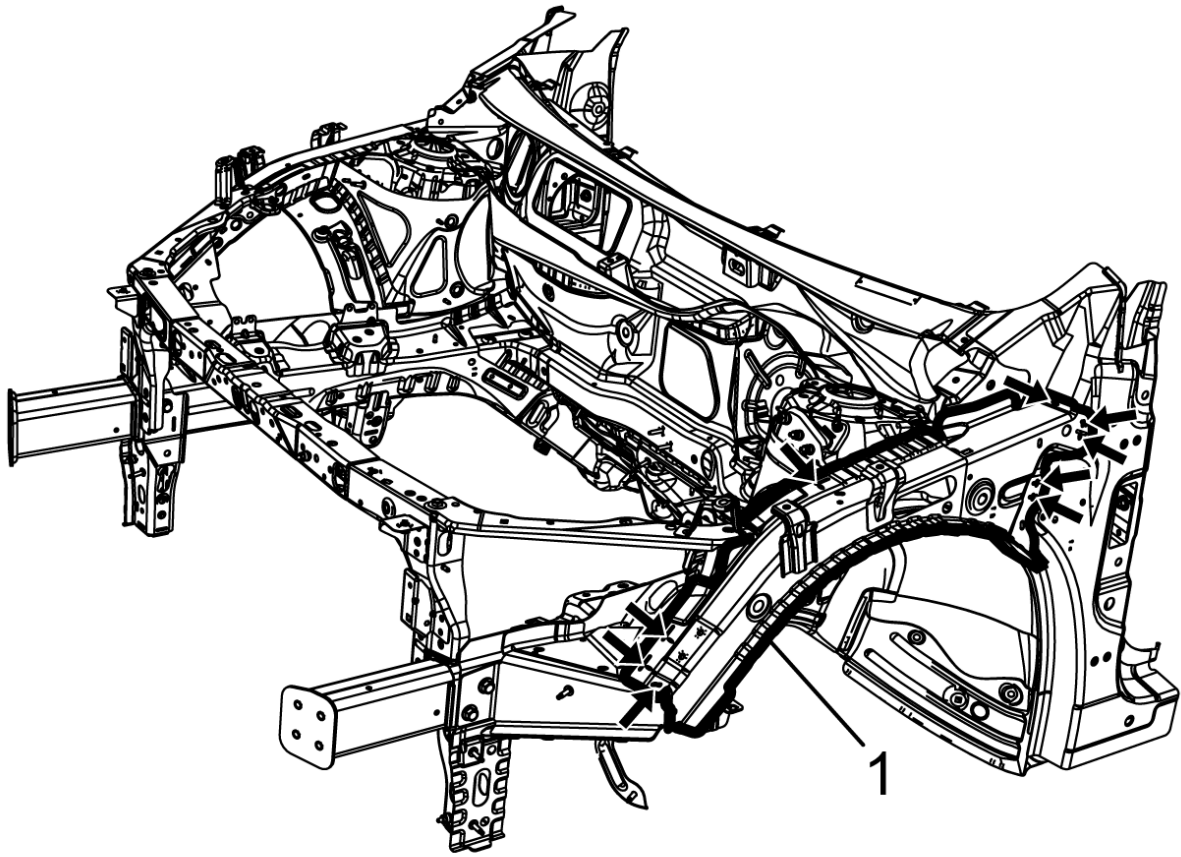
Front Compartment Upper Side Rail Brazing Welds
